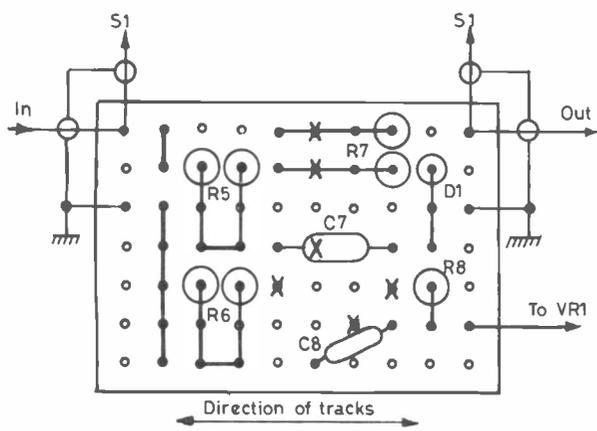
ACME TRANSMITTER SWR LAYOUT
